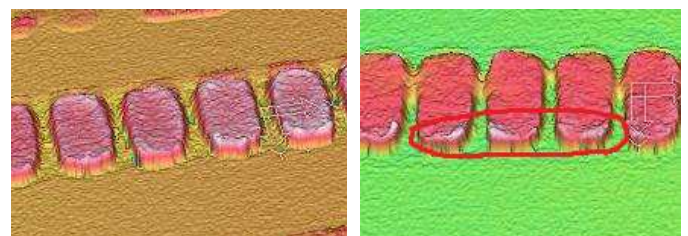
Comparison of good printed solder paste (left) and solder paste with defect deposition call one-side corner warpage.
